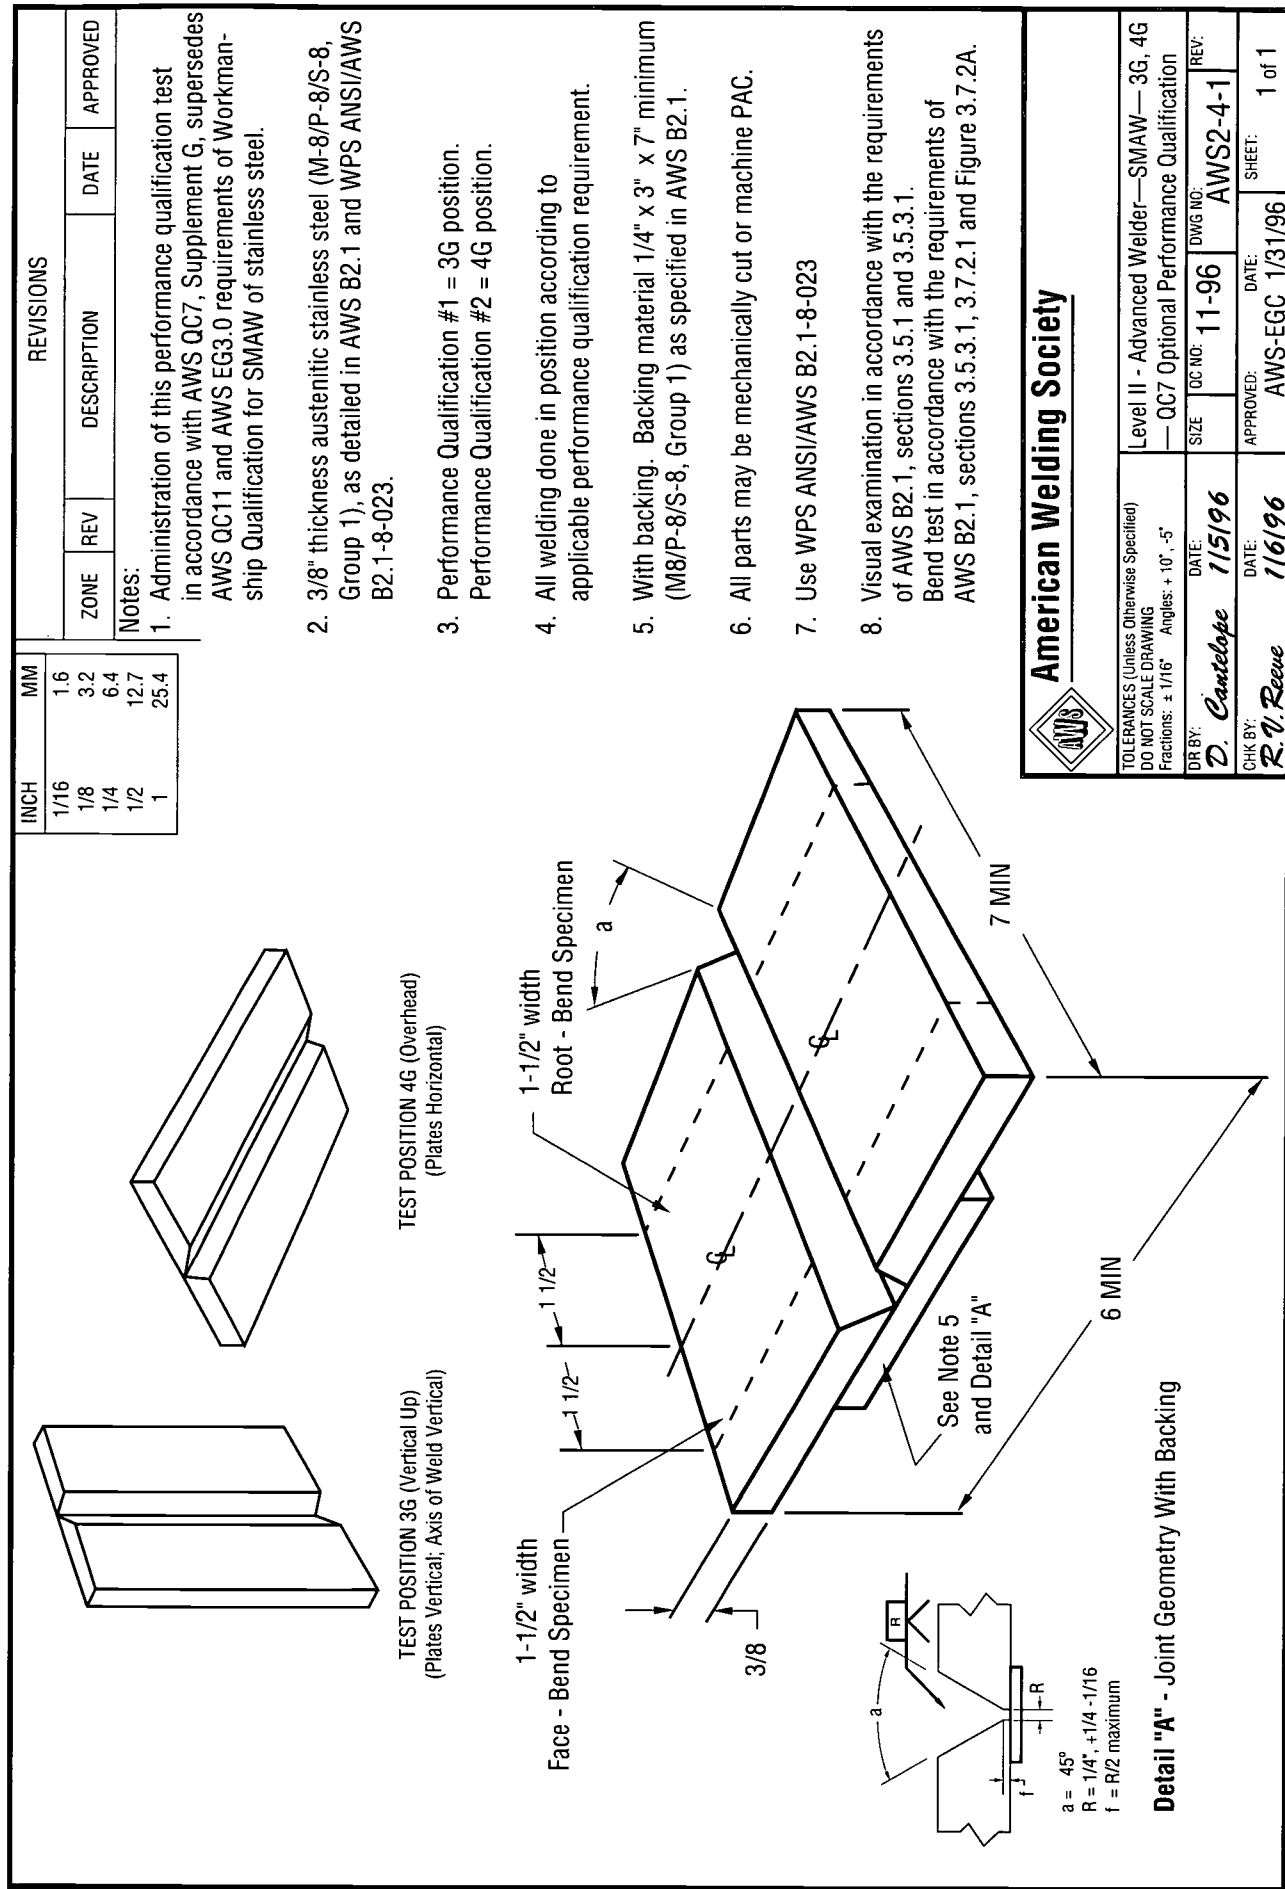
Level II - Advanced Welder, QC7 Optional Performance Qualification, SMAW Stainless Steel Plate.
